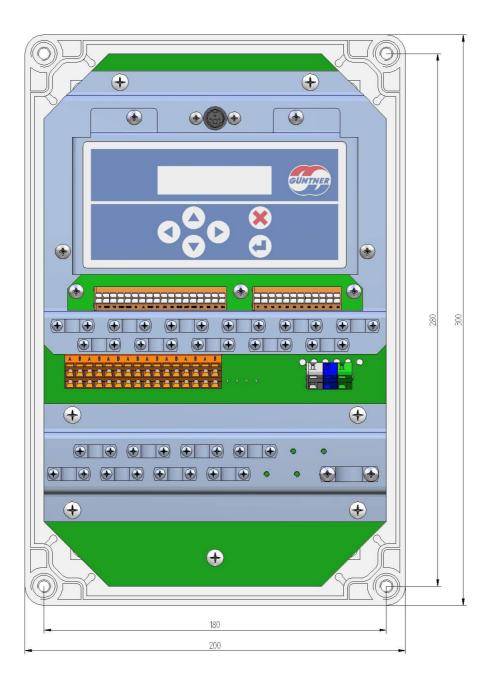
GMM EC/01 /04 /08 housing dimensions
